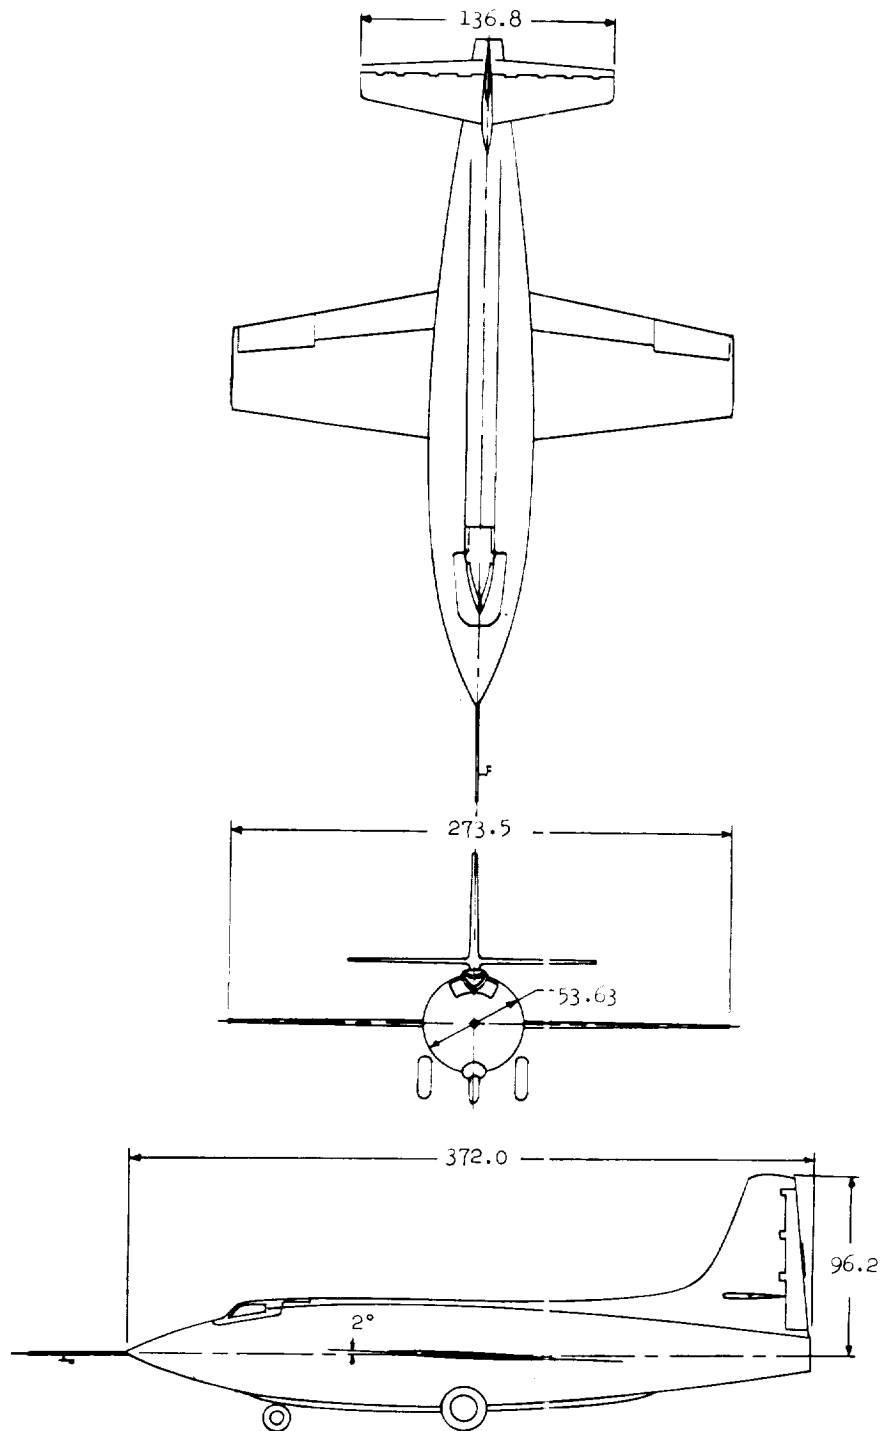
Three-view drawing of the X-1E airplane. All dimensions in inches.
